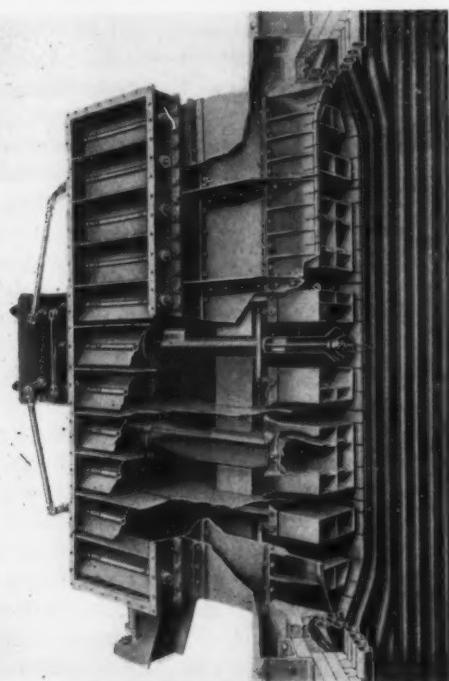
C-E Type T Burners for tangential firing. Operating mechanisms for secondary dampers and adjustable fuel nozzles are shown
